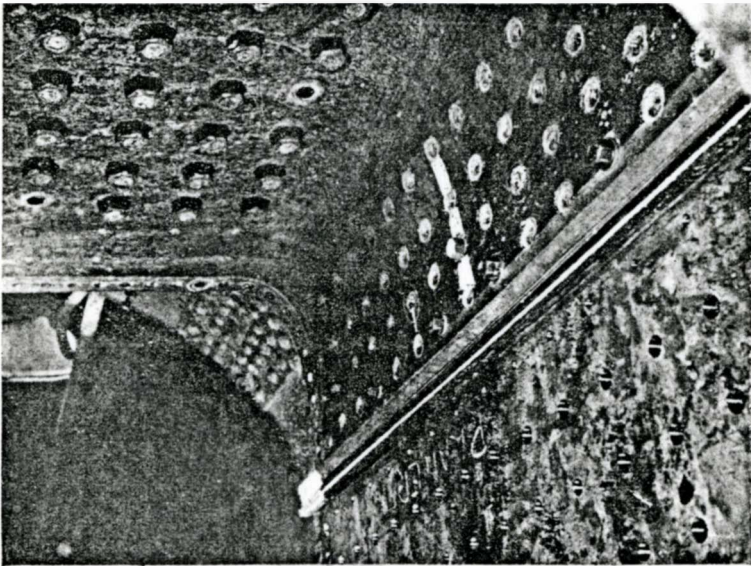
Locomotive firebox. New copper half side-plate in position for welding.
